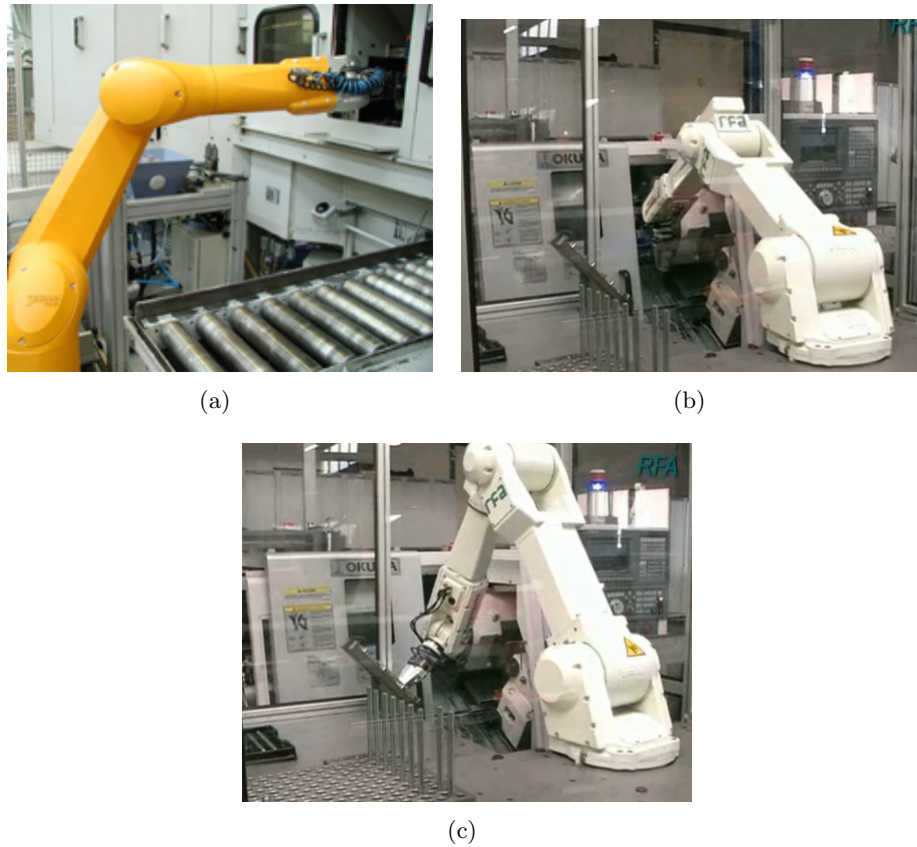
Manipulation tasks [90]: a) tools changing on machine; b) Work pieces positioning; c) Parts gripping
